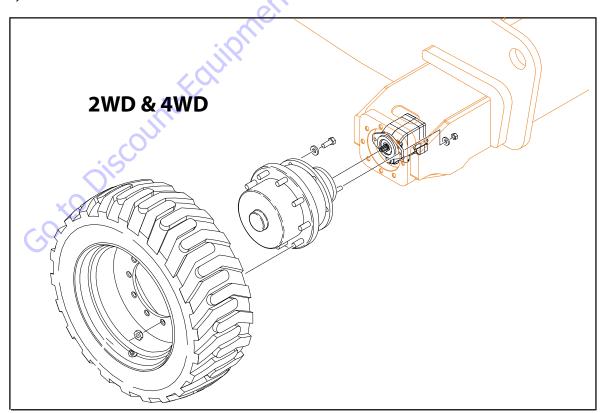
Drive Hub Installation - 2WD & 4WD (SN 0300083331 through 0300182743, B300000100 through B300001091)
